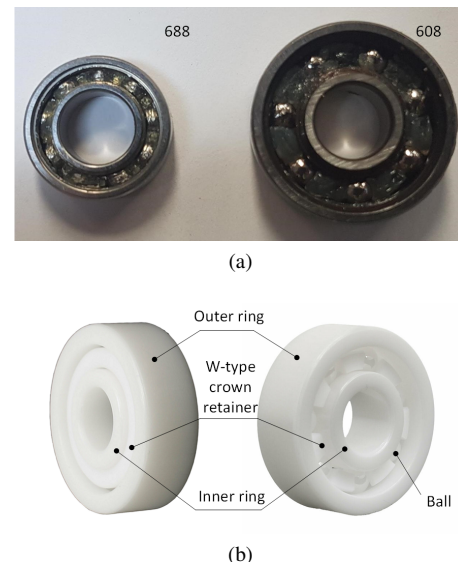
Deep-groove ball bearings: (a) steel ball bearings with mental seal removed, (b) full ceramic bearing.
